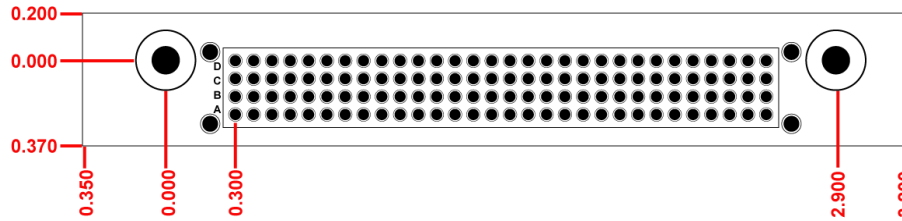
PC/104 Expansion Bus Connector Dimensions
